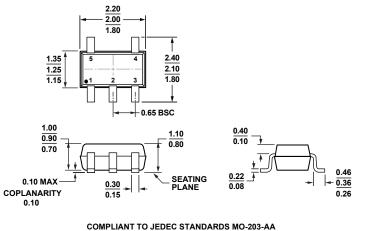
5-Lead Thin Shrink Small Outline Transistor Package [SC70] (KS-5) Dimensions shown in millimeters
